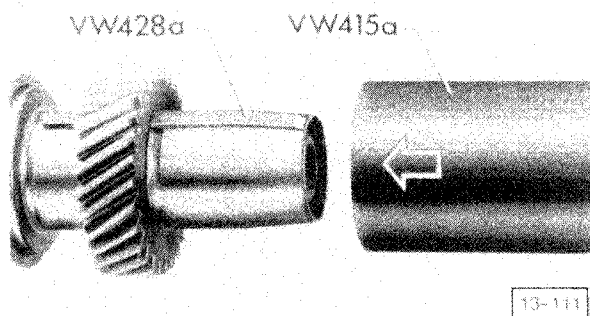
Distributor drive gear/crankshaft timing gear, installing
